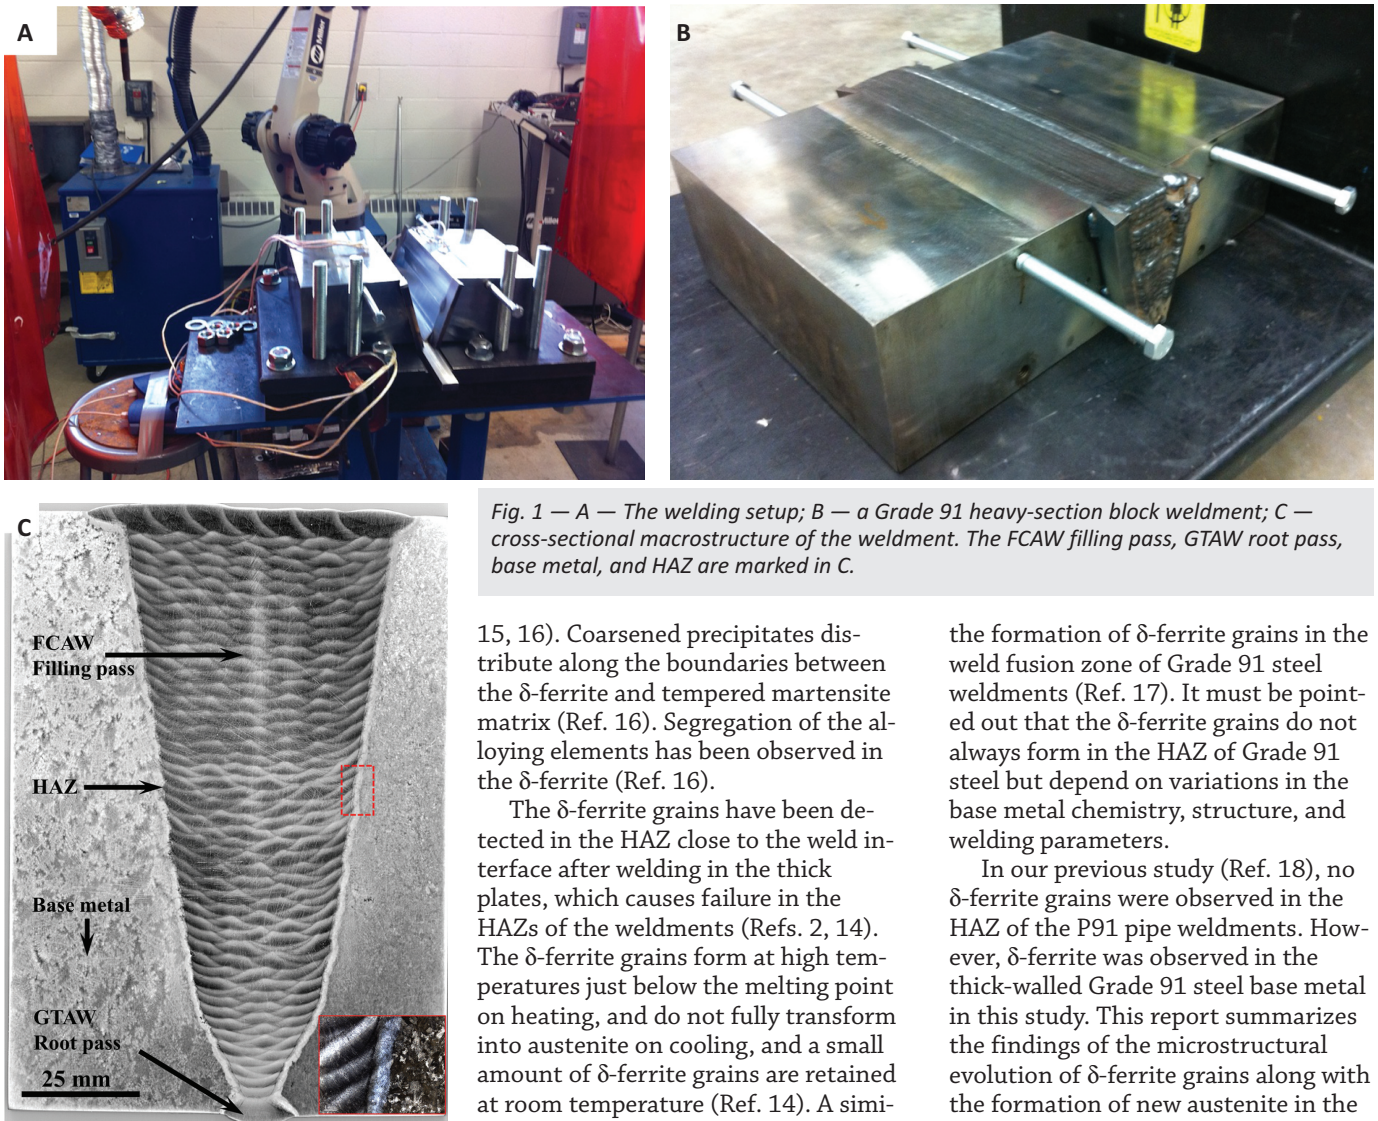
A — The welding setup; B — a Grade 91 heavy-section block weldment; C — cross-sectional macrostructure of the weldment. The FCAW filling pass, GTAW root pass, base metal, and HAZ are marked in C.
